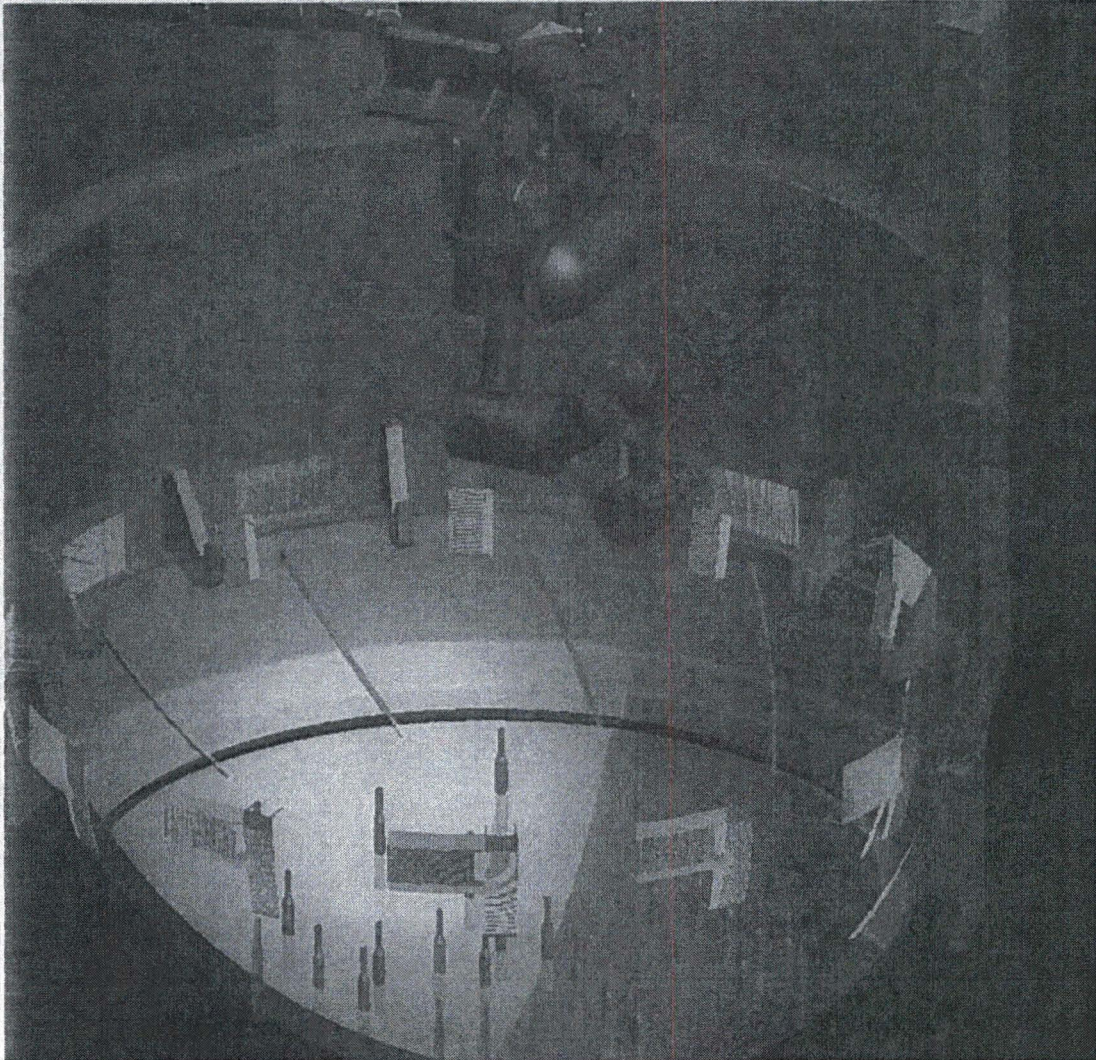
TWS Weld W05 – Lower shell to Lower Head Weld
